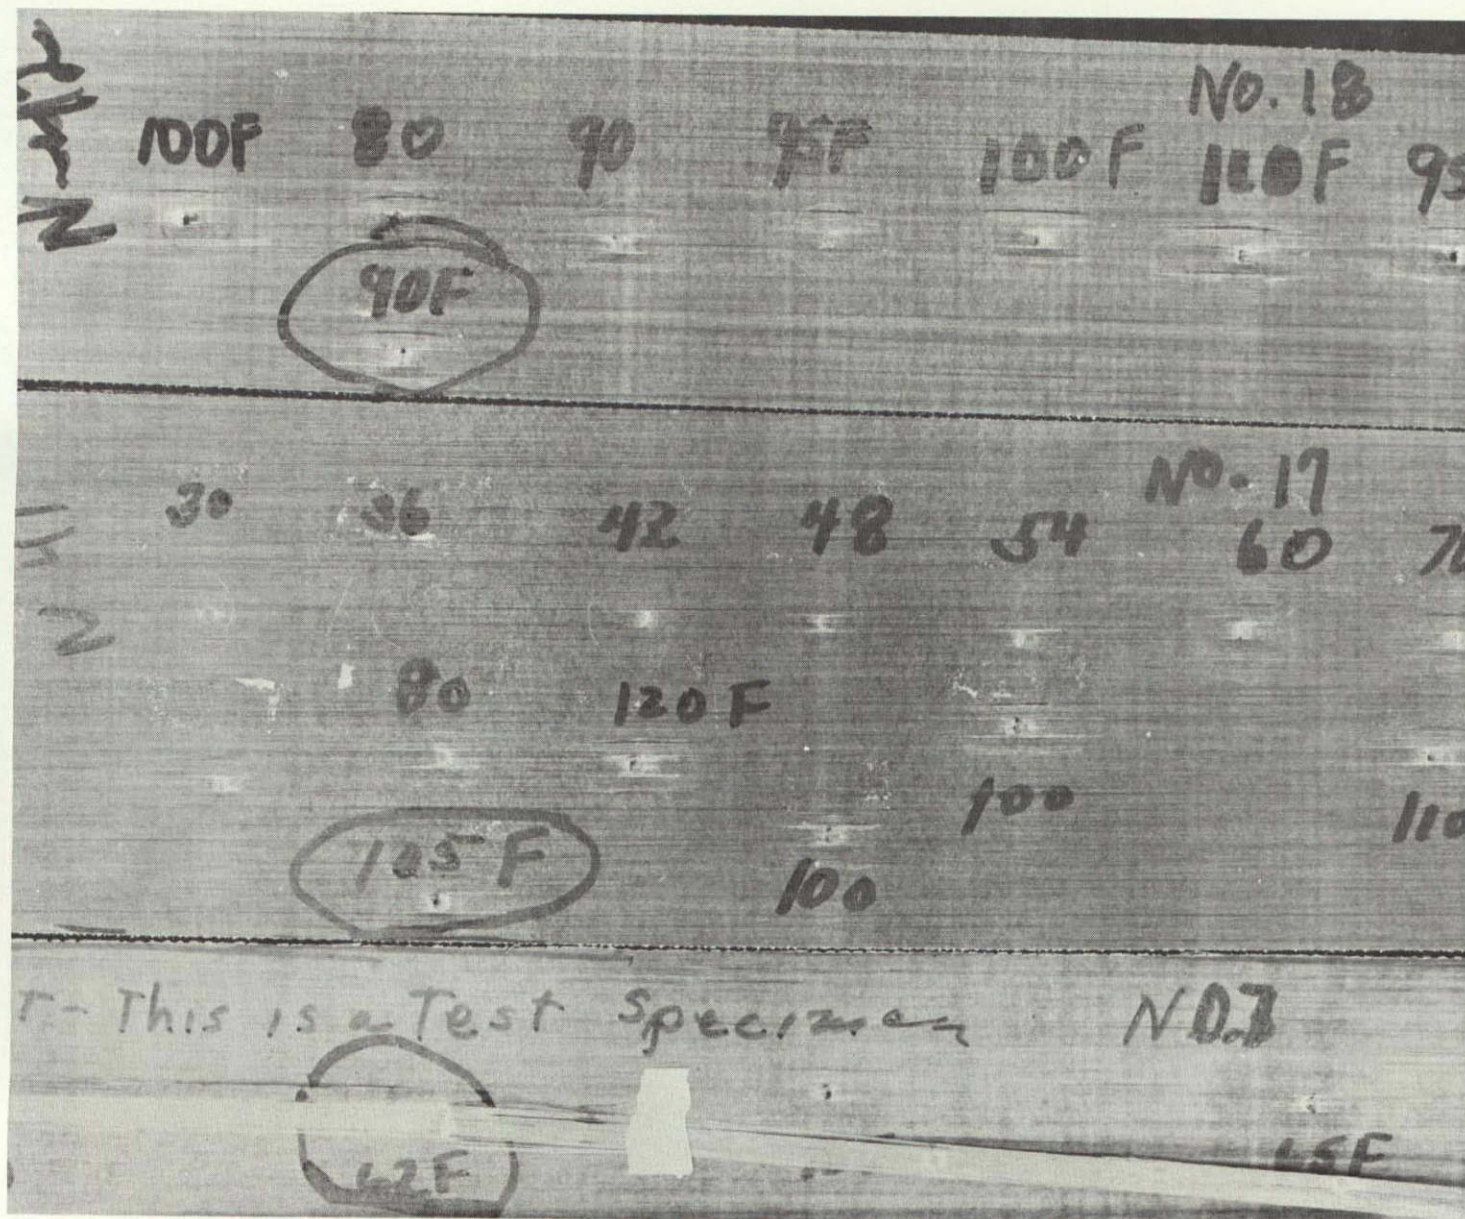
Typical Impact Damage to Unidirectionally Reinforced Face Sheets
